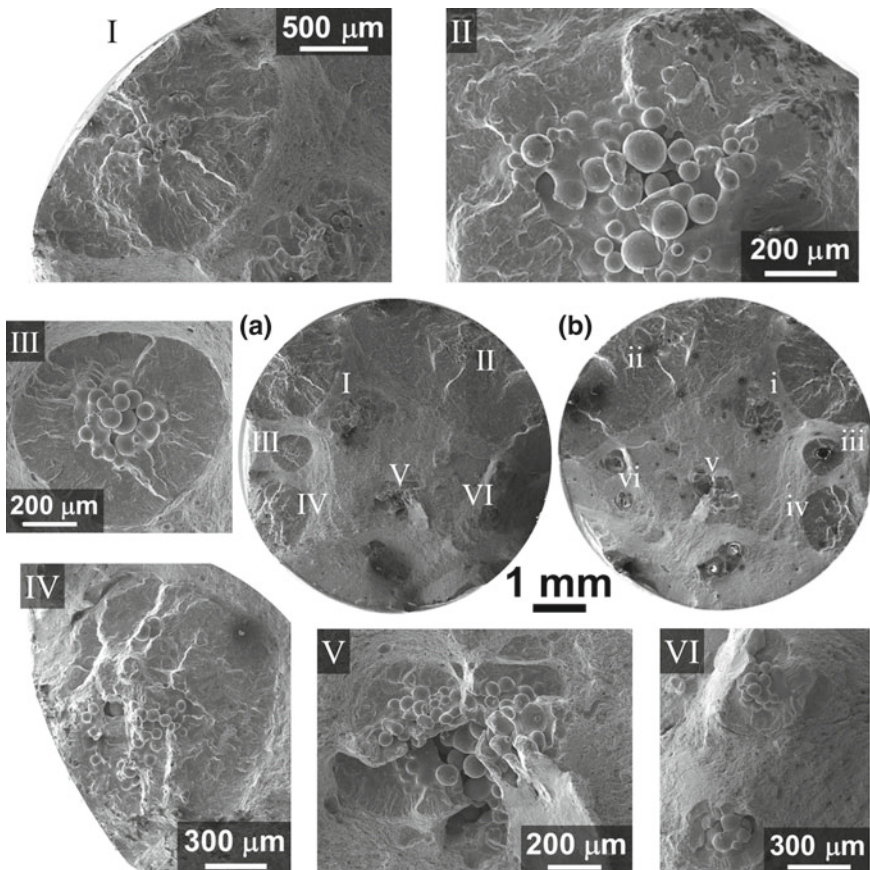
Both sides of the fracture surface (a, b) of the EBM 16-6-6 ann. specimen cyclically deformed at $\Delta\varepsilon_f/2 = 0.8\%$. (I-VI) Magnified views of selected defects marked by I-VI in (a). After [14]
